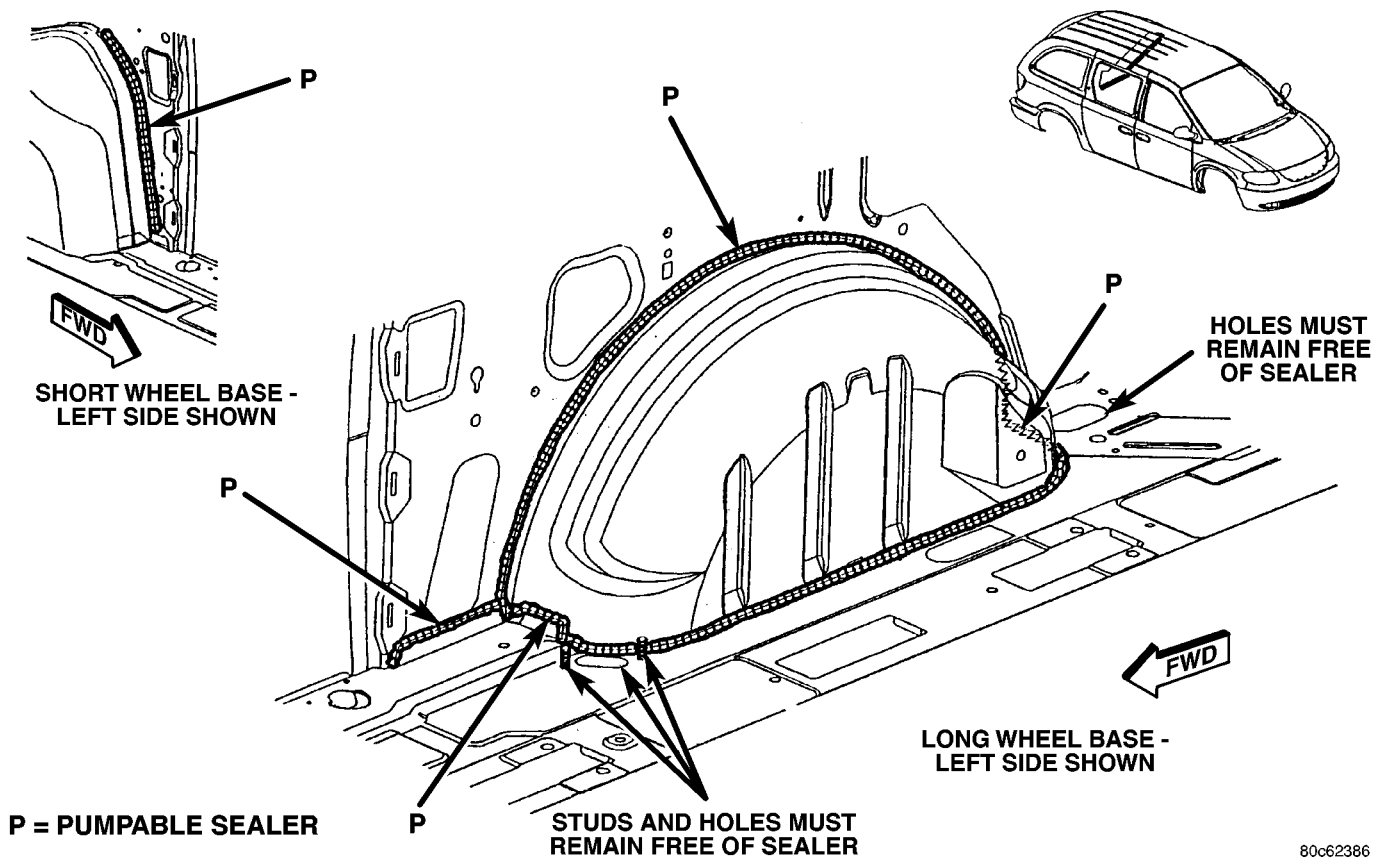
FLOOR PAN & REAR WHEELHOUSE AREA - LEFT AND RIGHT SIDES
